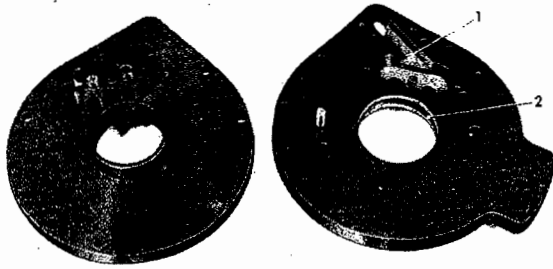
THE PUMP BODY AND COVER PLATE SEPARATED
